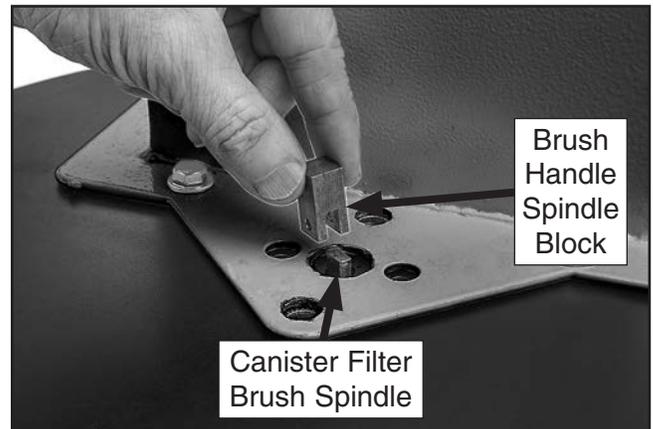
Attaching brush handle spindle block to canister filter brush spindle.
